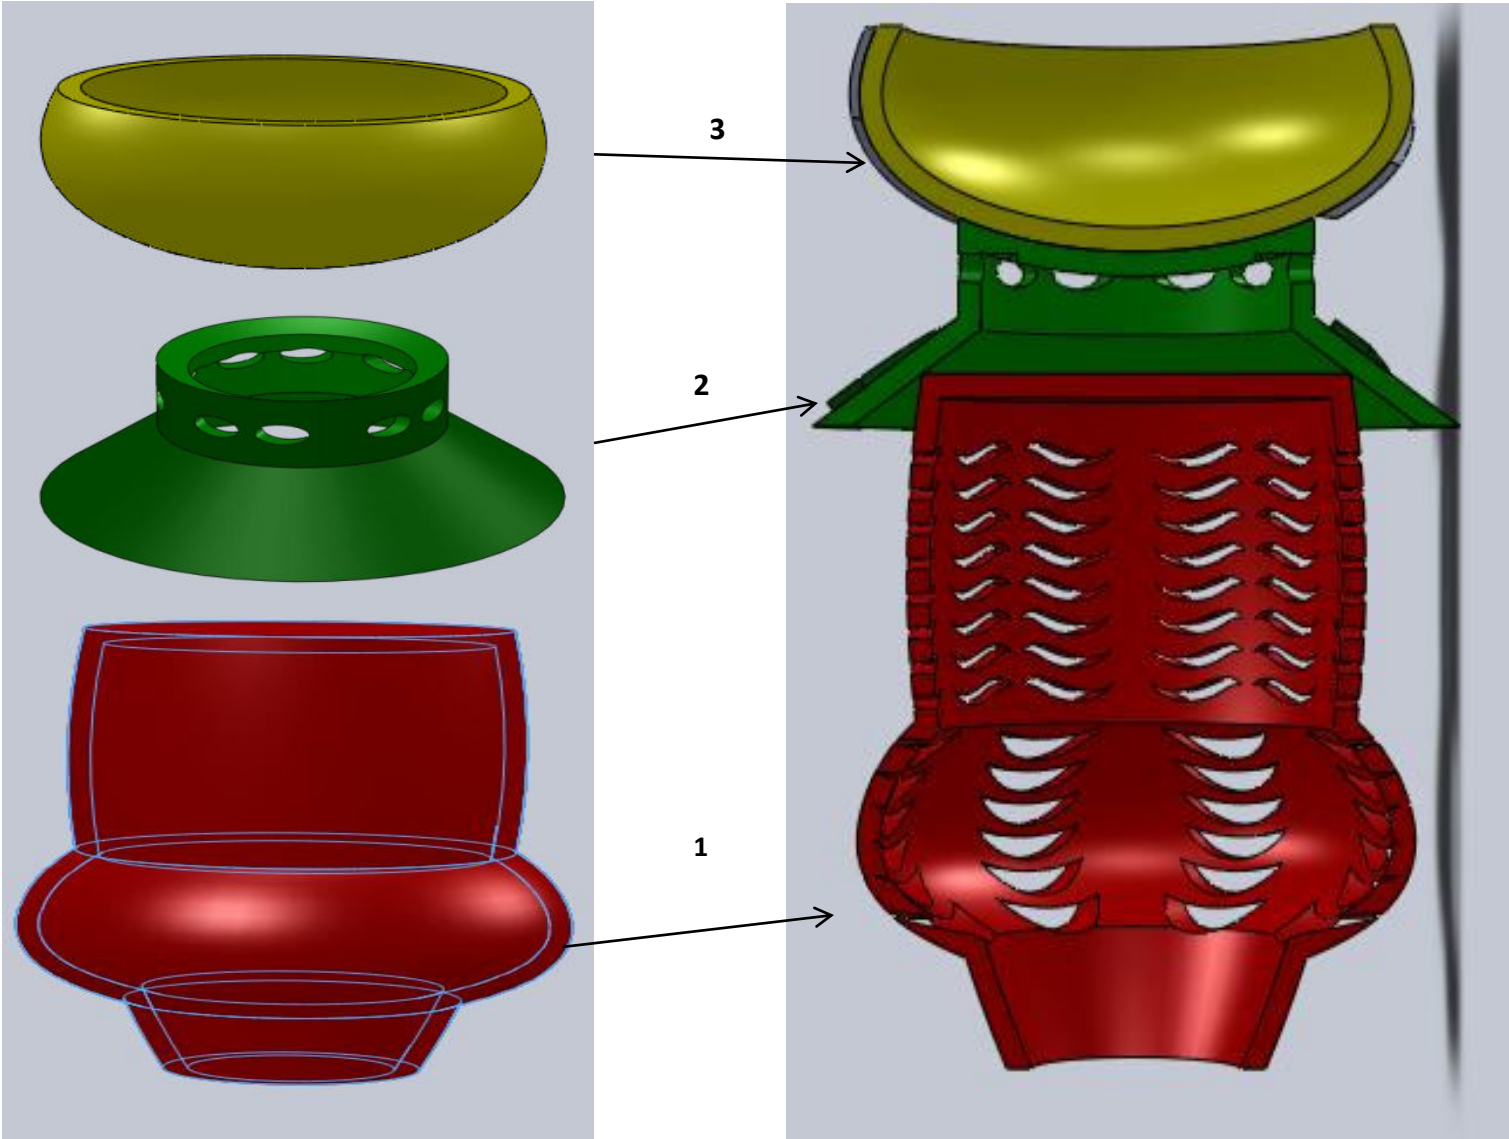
Product is done by three parts by throwing and assembled them together by using clay slip. Dissembled and cross section view of the product in CAD
